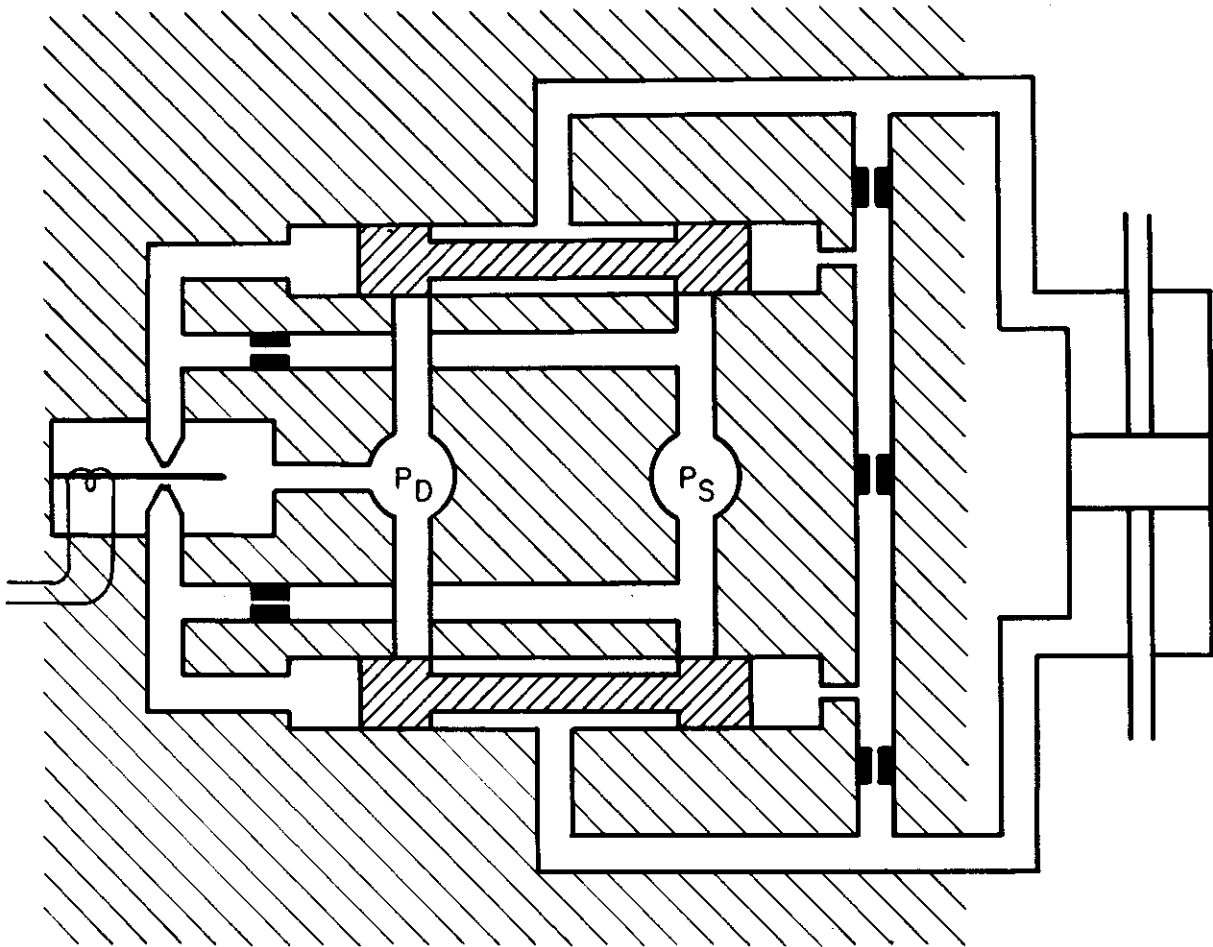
Schematic of Cadillac Gage PC-2 Valve
